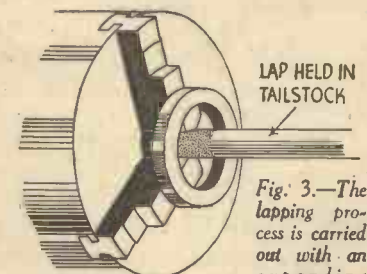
The lapping process is carried out with an expanding lap, rigidly held in the tailstock as shown.
